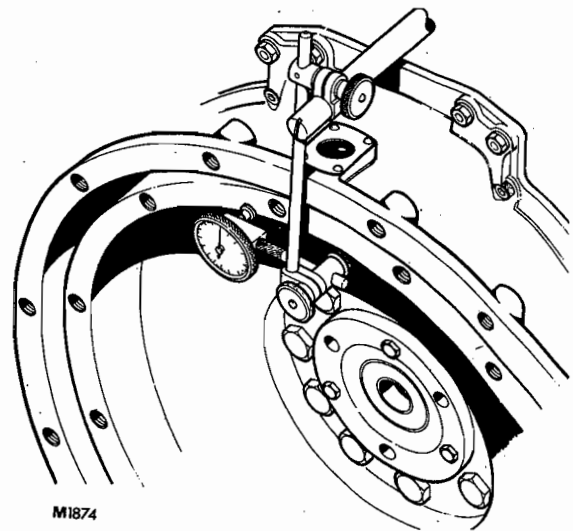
CHECKING FLYWHEEL FOR ALIGNMENT WITH CRANKSHAFT
